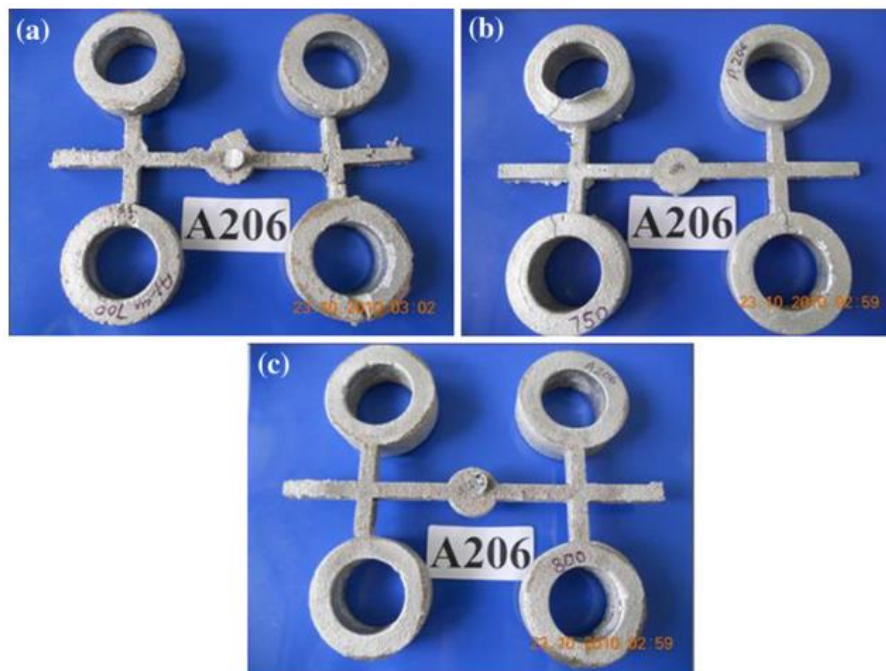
Picture showing cast surface of A206 cast alloy (a) Casting poured at 700 °C, avg. crack length 13.75 mm; (b) Casting poured at 750 °C, avg. crack length 41 mm; (c) Casting poured at 780 °C, avg. crack length 12.75 mm [14].
